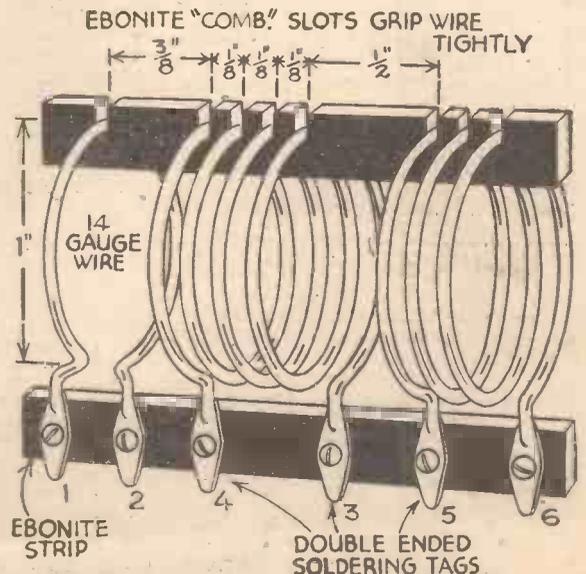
Showing a convenient and simple method of making an under 5-metre tuner.
